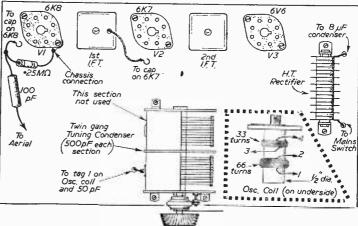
Top of chassis layout and inset (Fig. 2) the oscillator coil.
